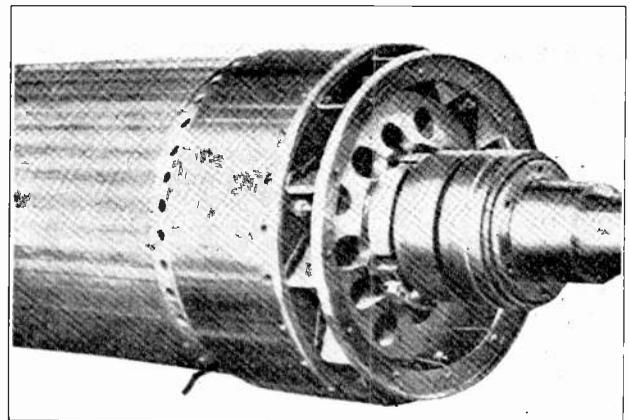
End-view of high speed field rotor showing shield ring over the coil ends and also showing ventilating blades and slip rings.
